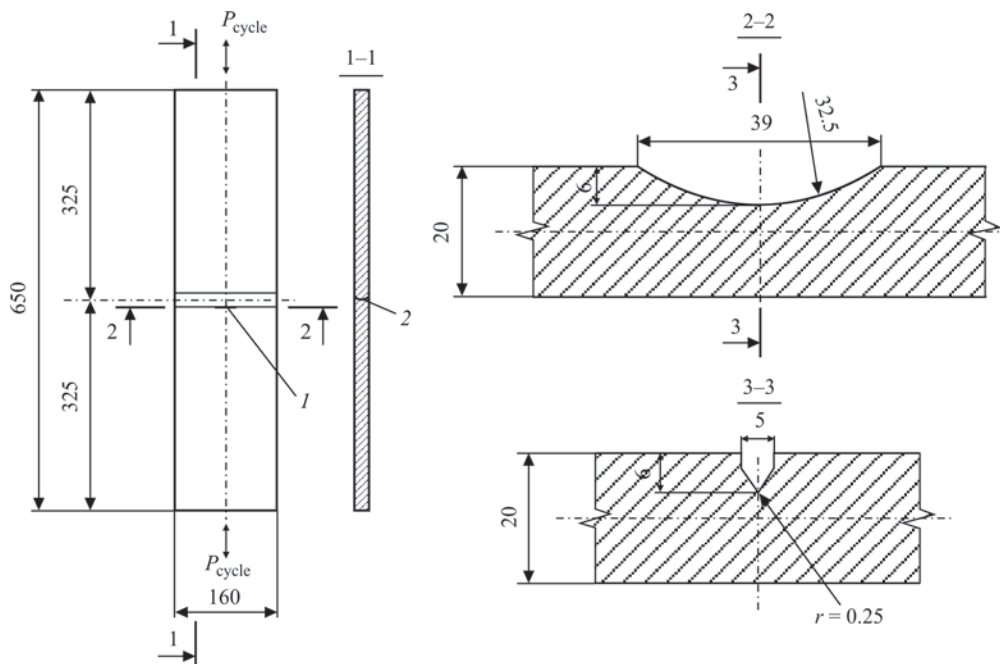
Schematic of a sample for testing welded joints of steel 09KhG2SYuch-U for resistance to fatigue crack propagation: 1 – notch in the HAZ; 2 – weld reinforcement was removed on both sides
